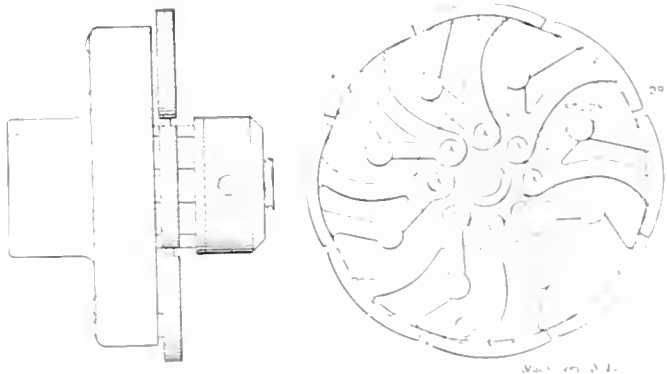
shows how stock can be cut off in an engine lathe fully as quickly as in a screw machine. The cut shows the method so clearly that I think it requires no further description.
